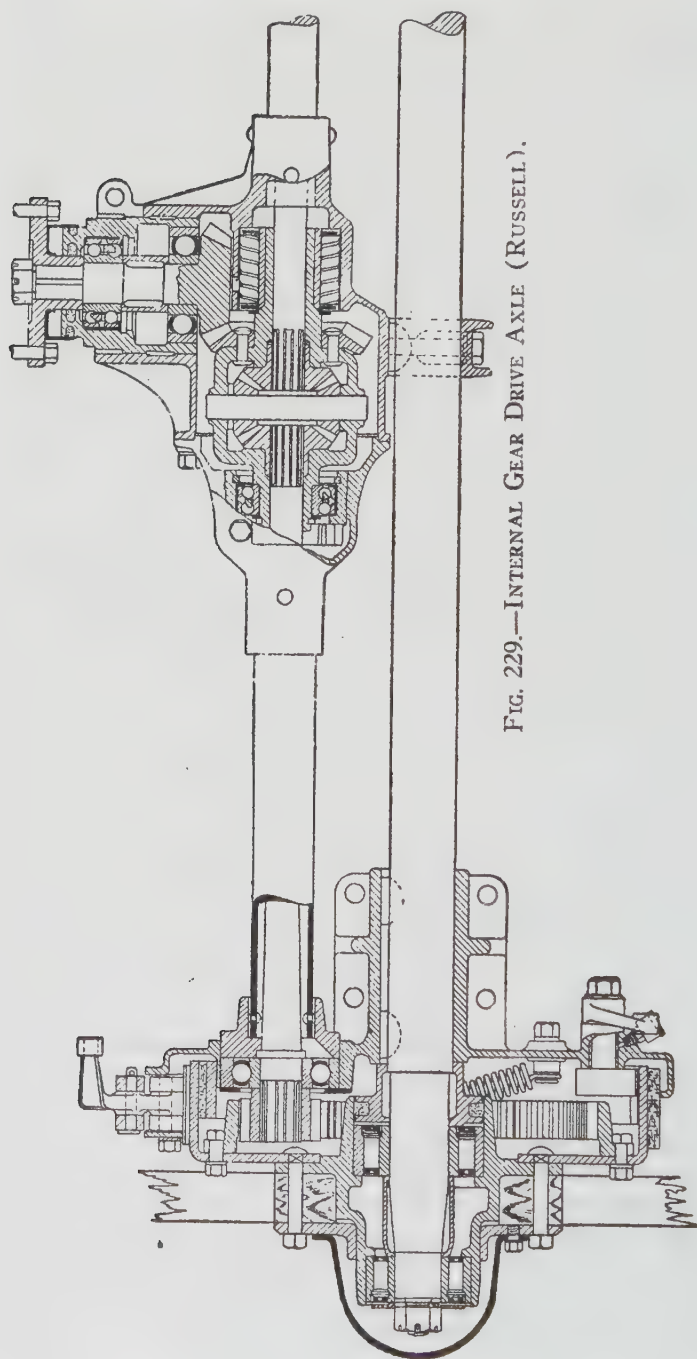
INTERNAL GEAR DRIVE AXLE (RUSSELL).
